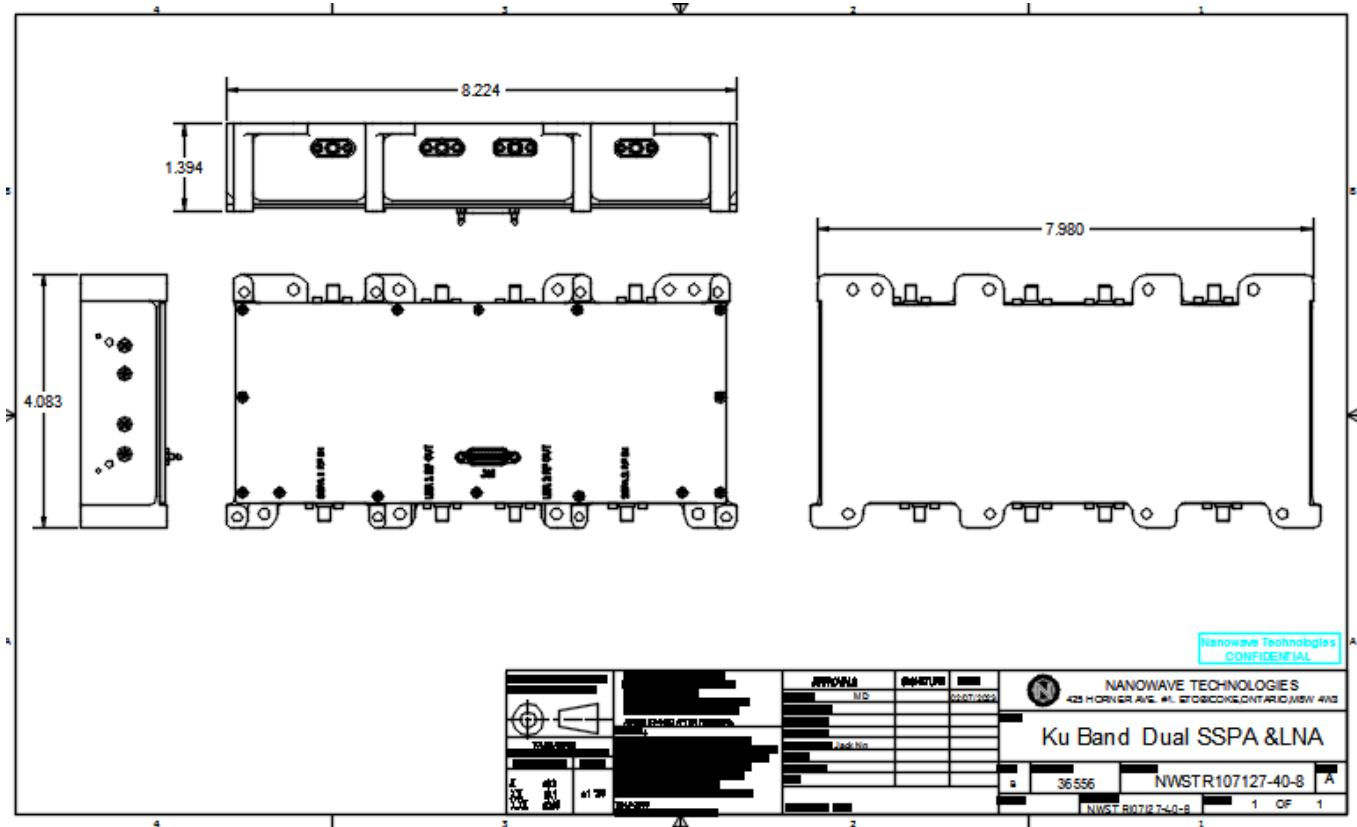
Outline Drawing of Ku-band User Integrated LNA and SSPA
